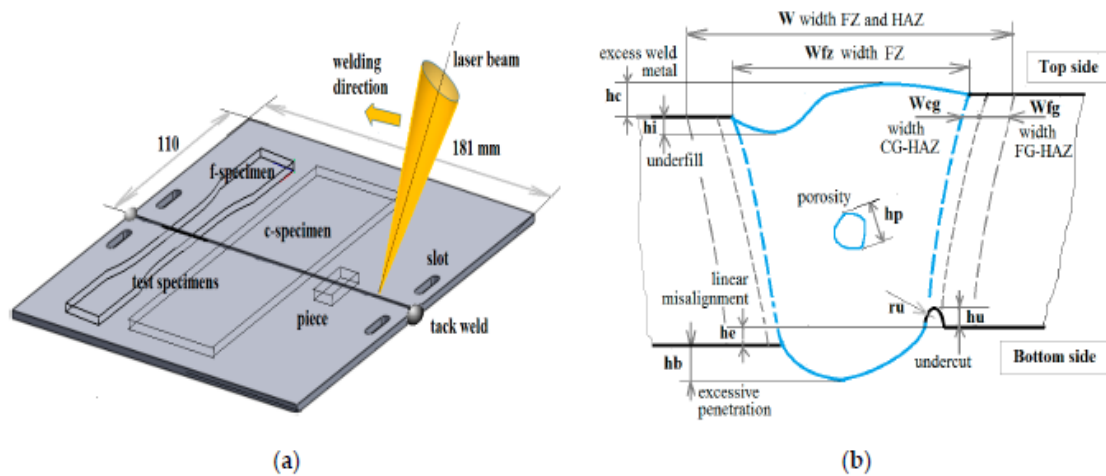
Schemes of: (a) the welded sample; (b) the weld bead with designations of typical imperfections and zones produced by welding.
